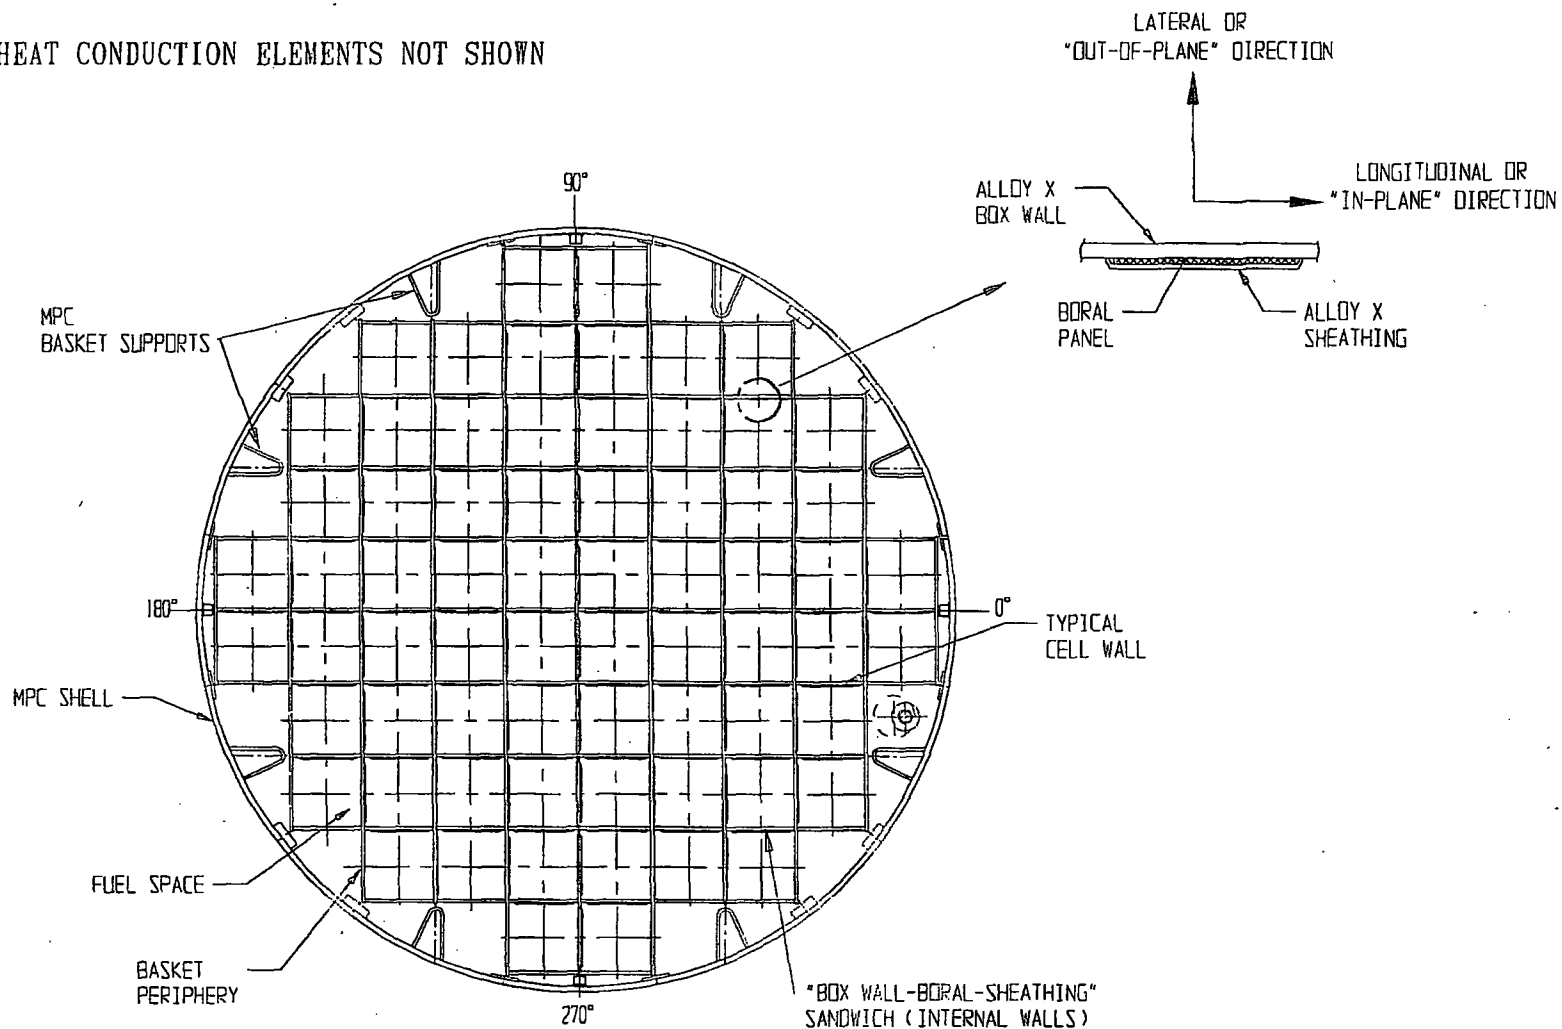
; TYPICAL MPC BASKET PARTS IN A CROSS-SECTIONAL VIEW
